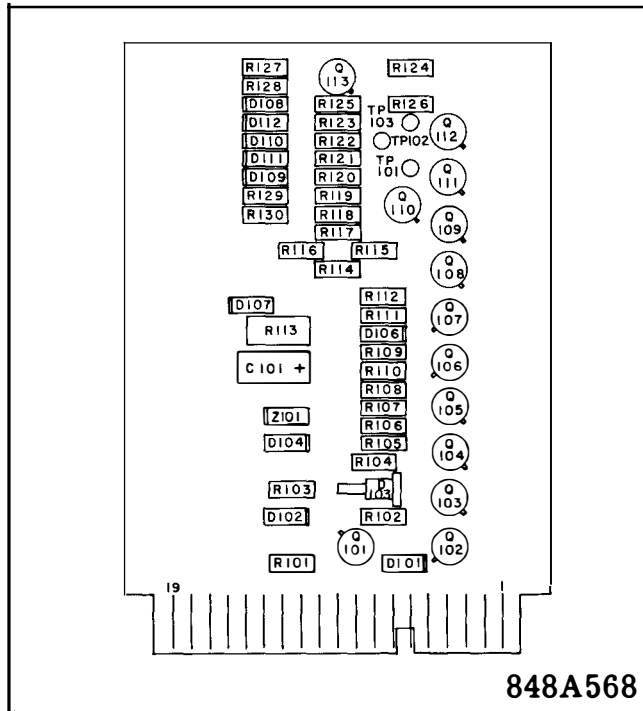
Component Location on Amplifier and Keying Printed Circuit Board for Type SKBU Relay
